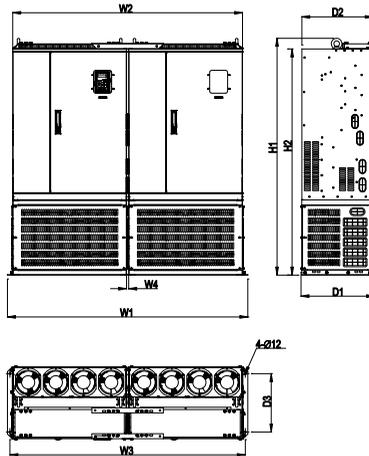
Parallel mounting diagram for 380V 560-630kW and 660V 710kW
